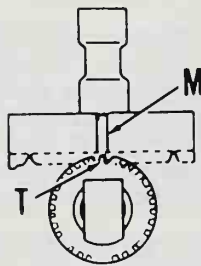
Mark (M) on rack should align with control sleeve master tooth (T).
